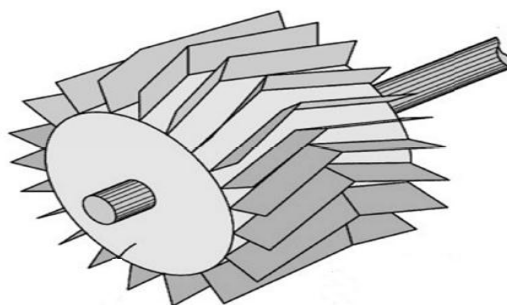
The Rotor Blades Mounted on the Transmitting Shaft.
